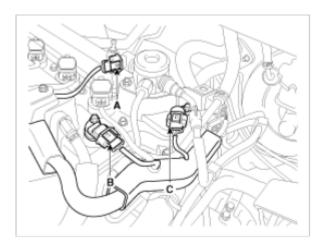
Identifying Ignition Coil, Injector Extension, Variable Intake System And Purge Control Solenoid Valve Connectors Courtesy of HYUNDAI MOTOR AMERICA
